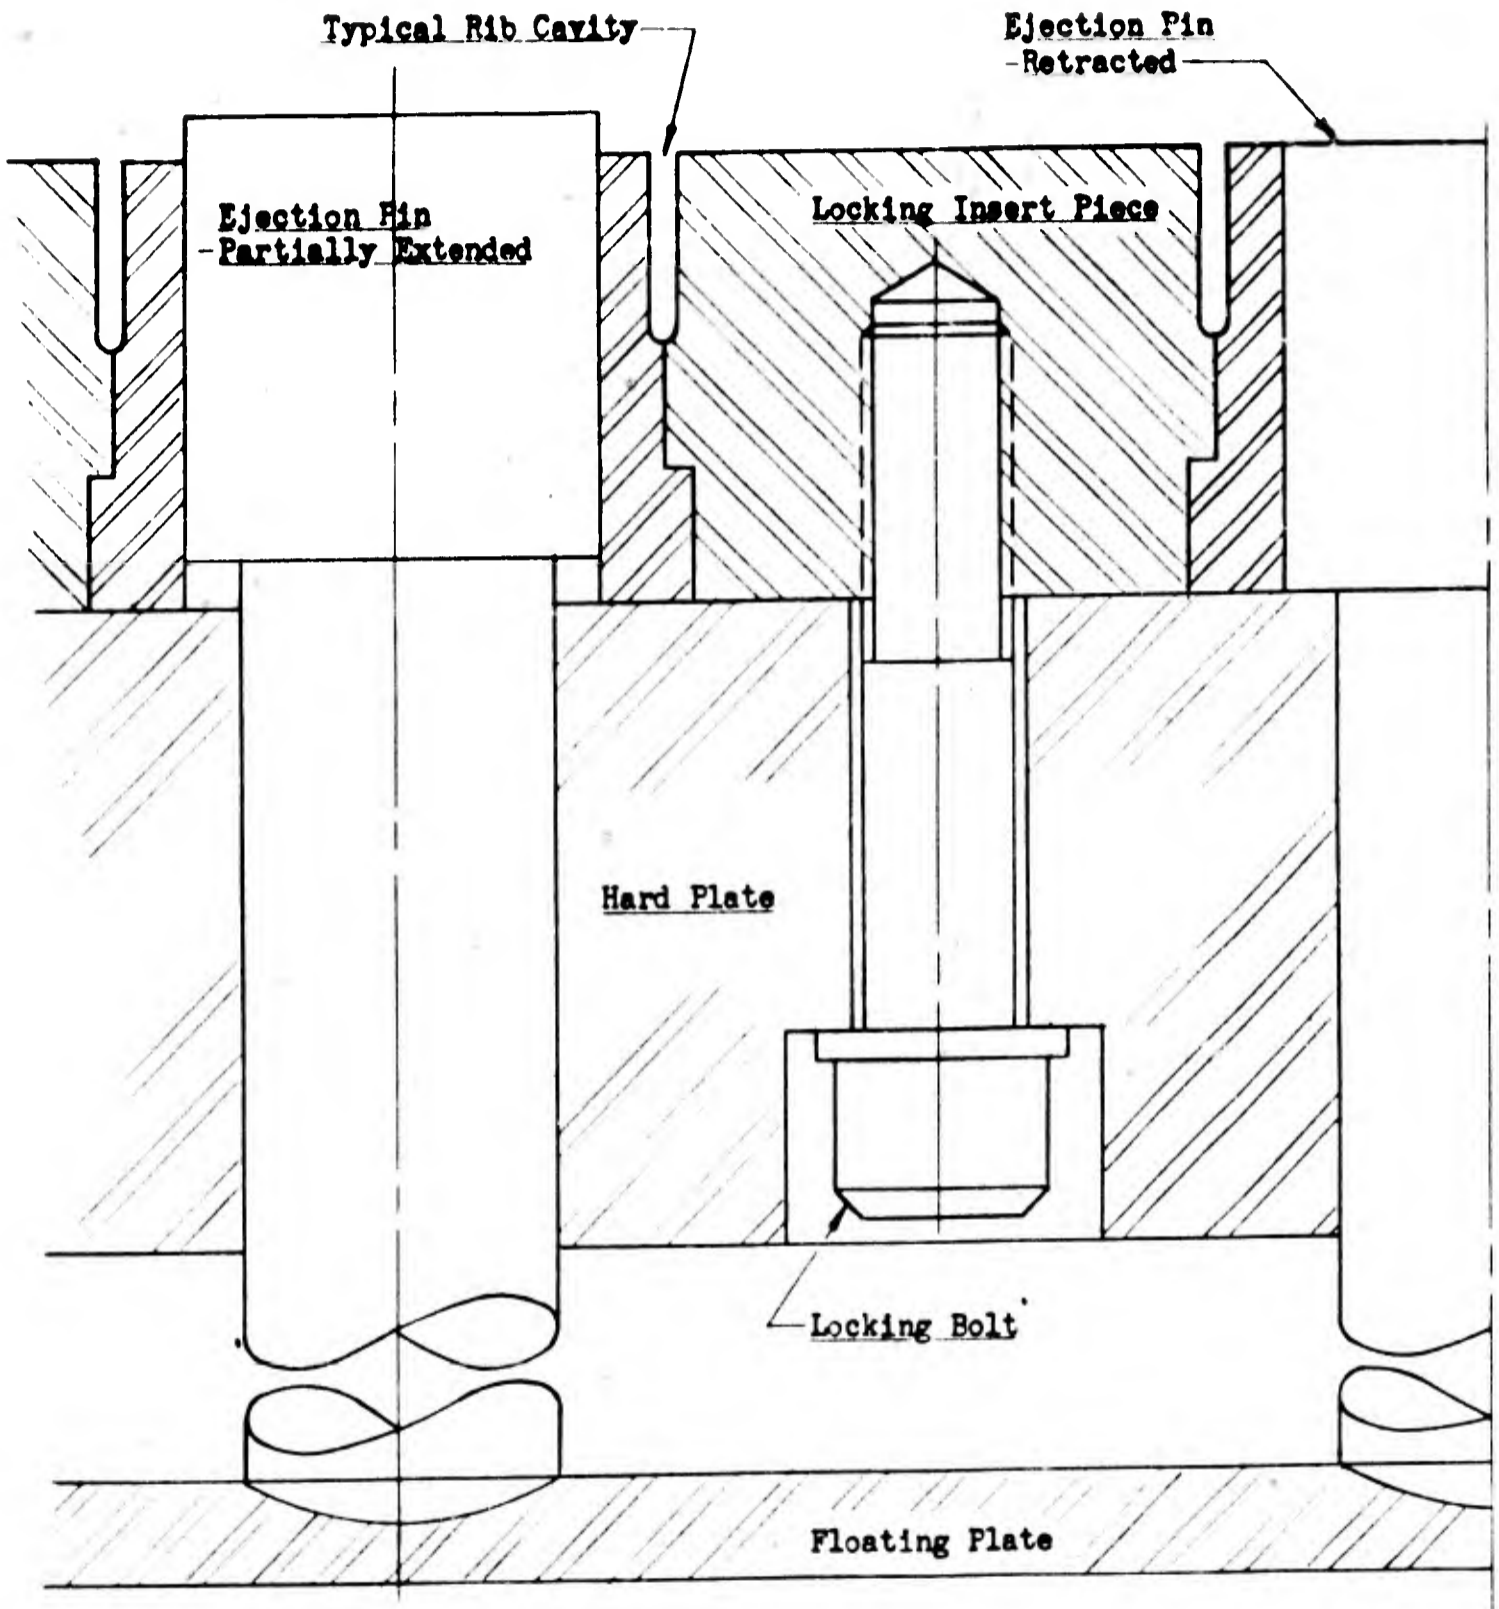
Section Through Bottom Die Showing Insert Locking Ejection System
